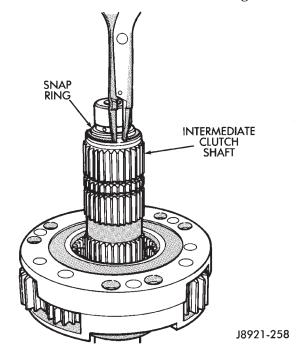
Intermediate Clutch Shaft Snap Ring Removal
